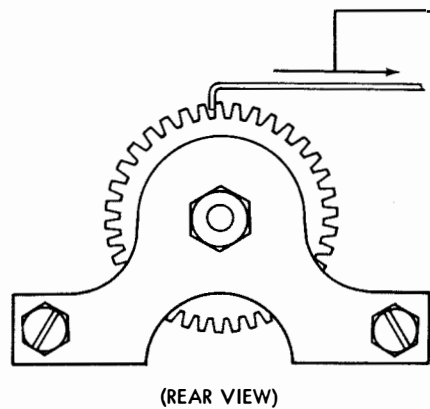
KEYBOARD, SIGNAL GENERATOR CLUTCH AND GEAR MECHANISM
